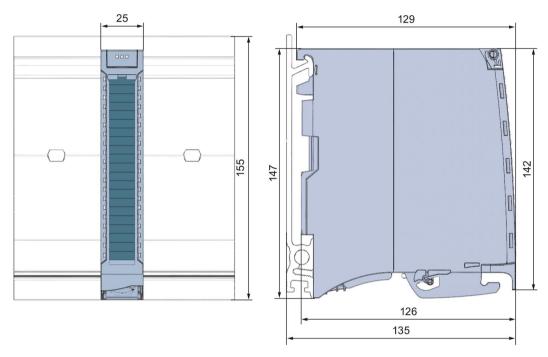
Dimensional drawing of the DQ 32x24VDC/0.5A BA module
